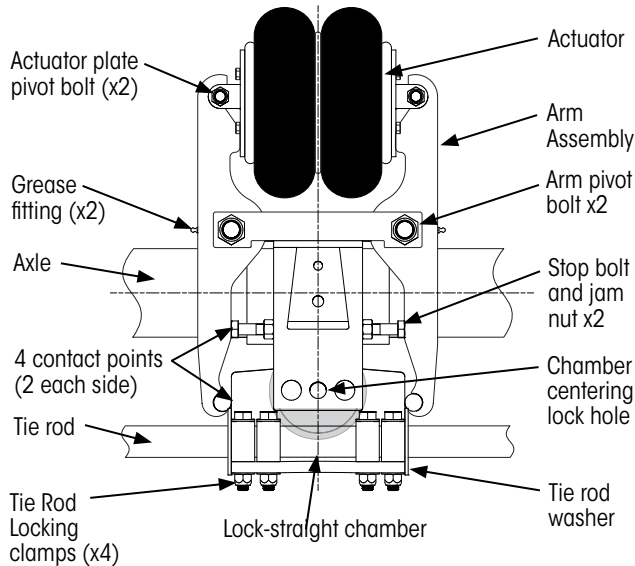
Self-steer axle lock-straight assembly (Bottom view)
